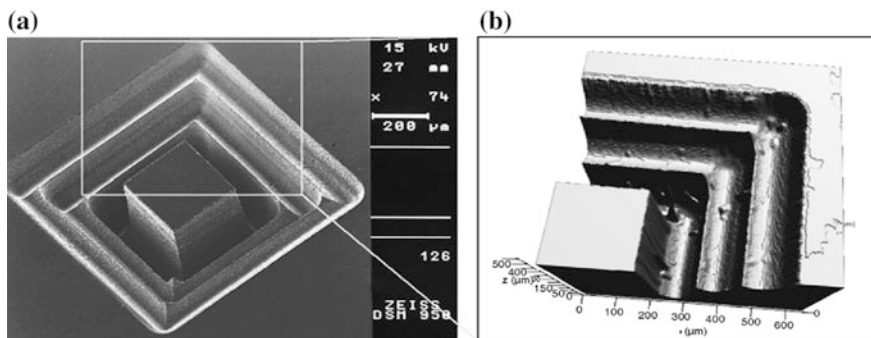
Microcavity machined on hot-forming tool by EDM milling, using tool diameter of 0.1 mm [41] (with kind permission from ‘Elsevier’)
